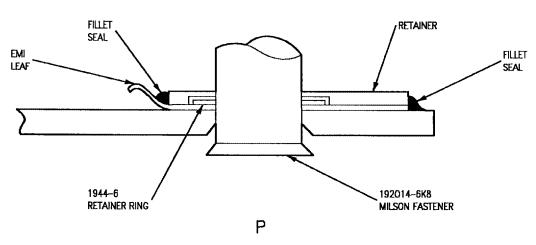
Door 3 Fastener Hole Repair (Sheet 5)
